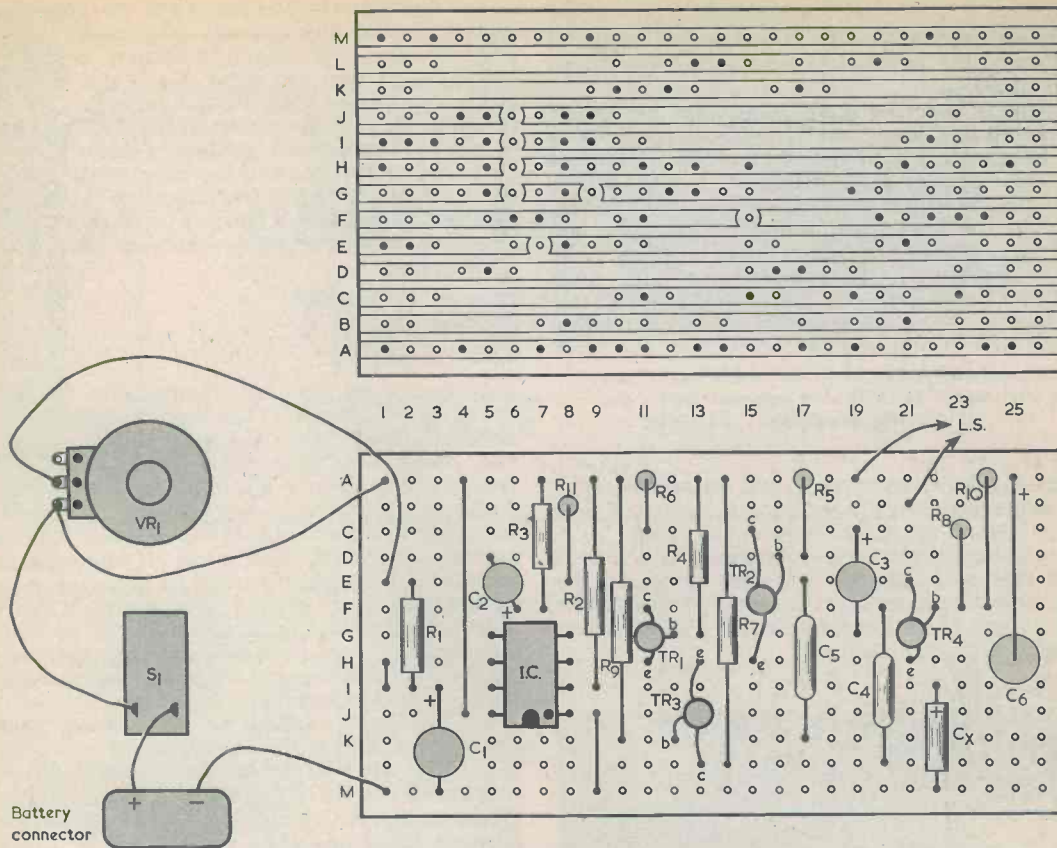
Illustrating how the components are wired up on the Veroboard panel
